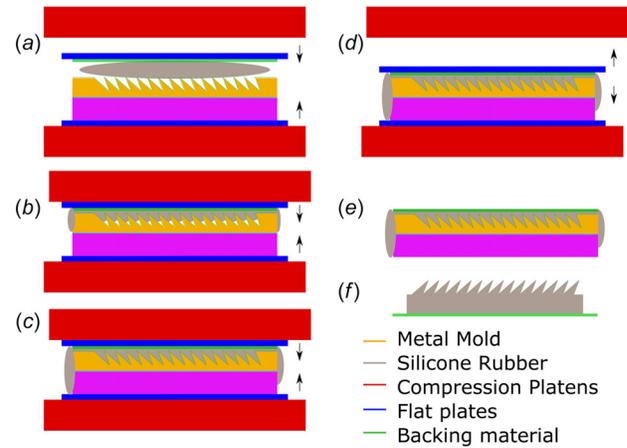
Flow diagram showing the steps of hot compression molding with metal molds. The steps (A–F) are described in Sec. 2.1.
